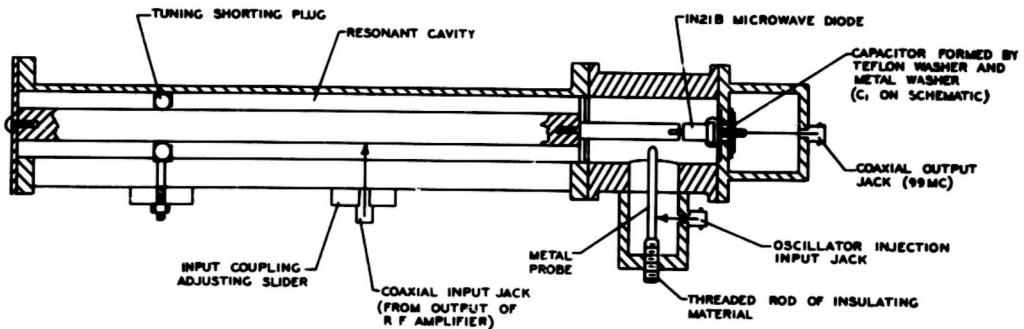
Cross Sectional View of Crystal Mixer Assembly
